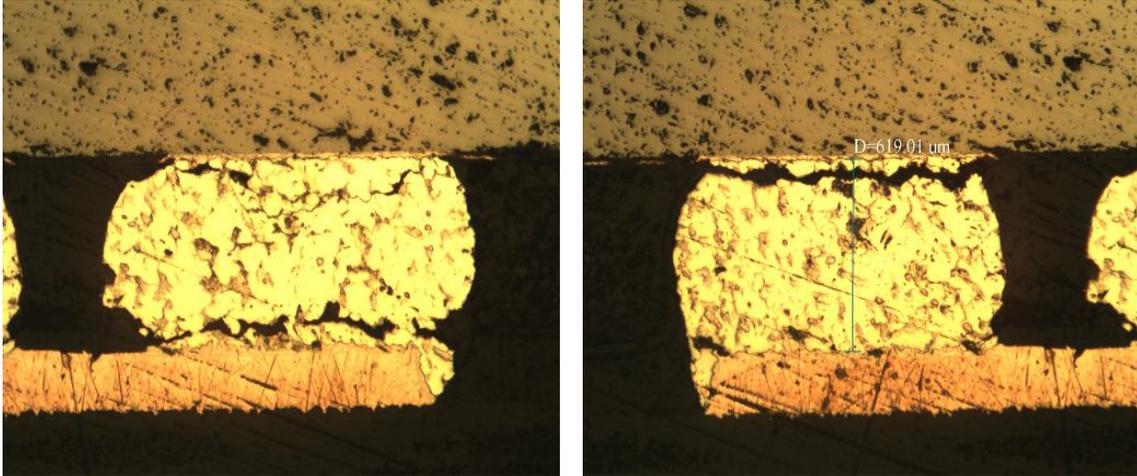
Epoxy 3 CSP Solder Ball Cross Sections showing Solder Joint Failures, 1200 Cycles
